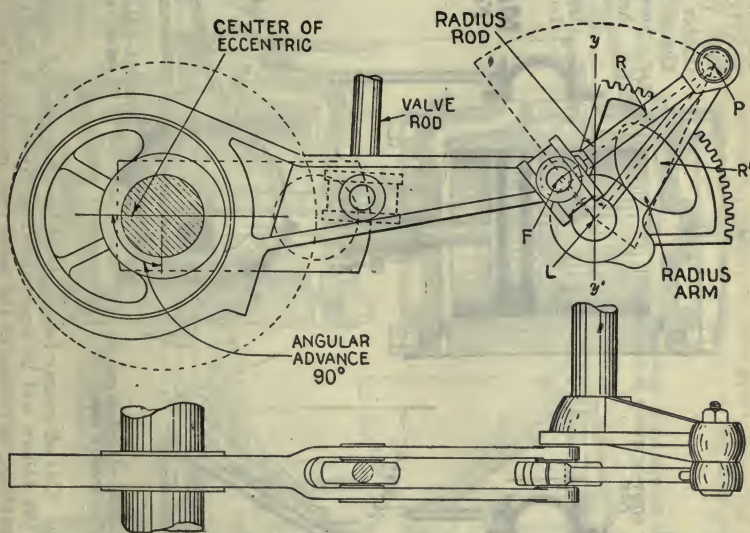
Construction detail of Marshall valve gear showing general proportion of parts.
